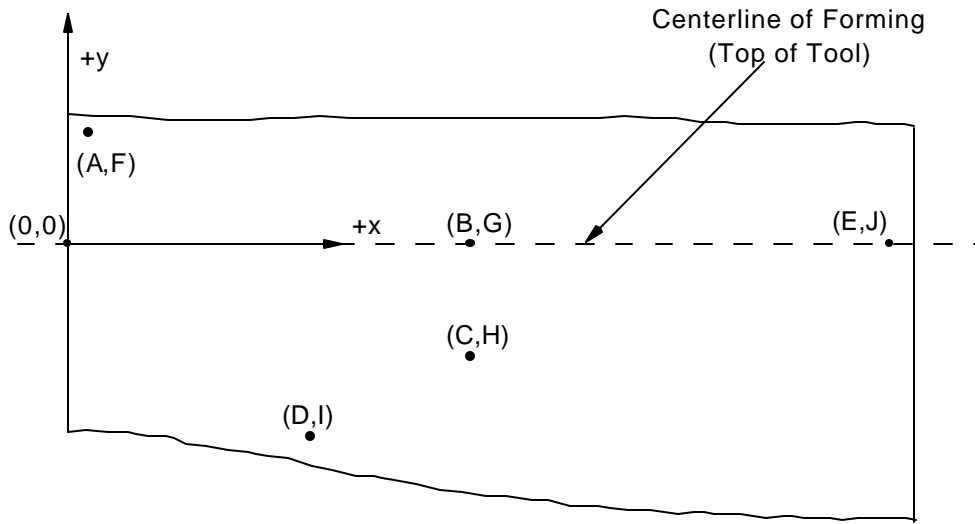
Thermocouple positions on flat pattern of blast shield tool.
